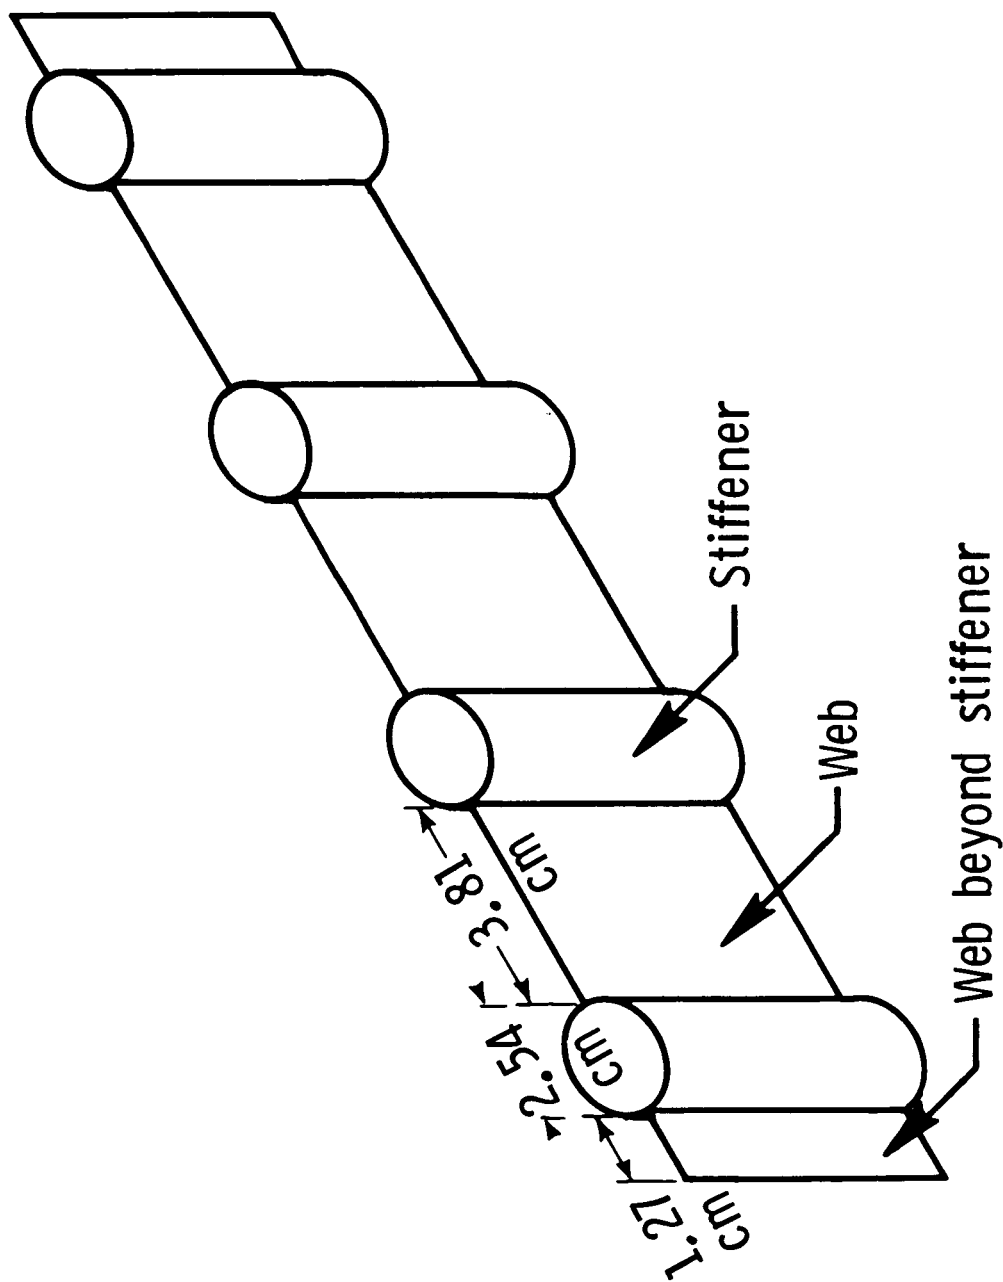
Sketch of four stiffener circular cross-section tube stiffened beam.
